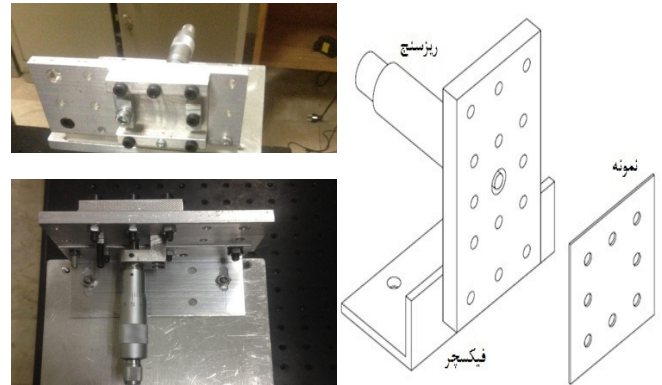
The Fixture used to pressure loading at the center of the specimen.
